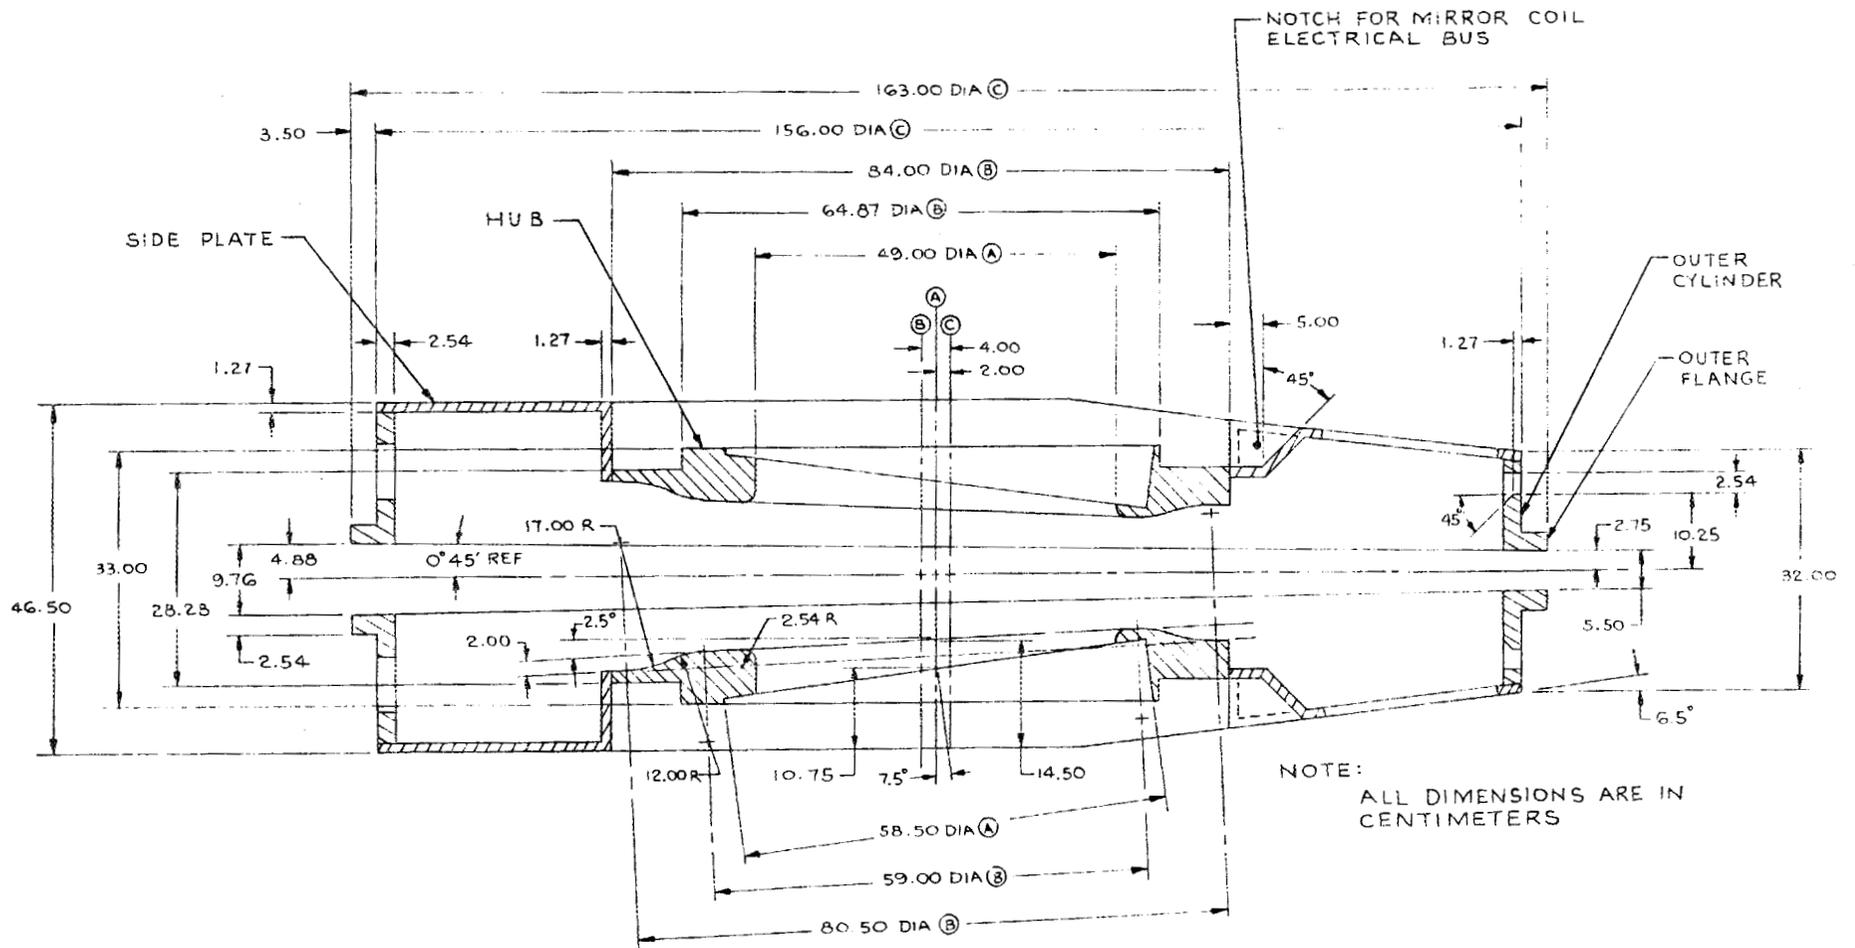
Horizontal Plane Cross Section Through the Divertor Cavity Showing the Components of the Weldment Assembly and the Machining-Centers and Axes
